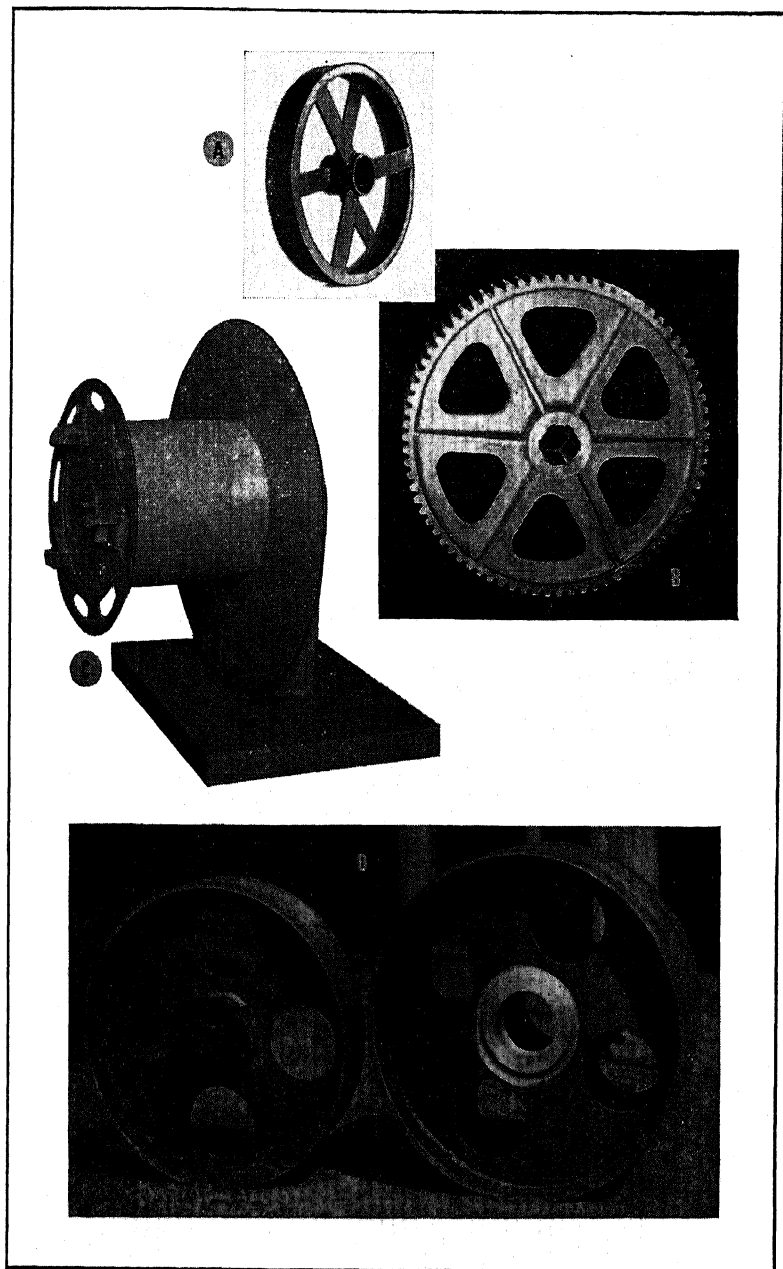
MISC. PARTS—(A) Wheel for hand-truck. (B) Small spur gear. (C) Wire reel. (D) Pair of shovel wheels.
